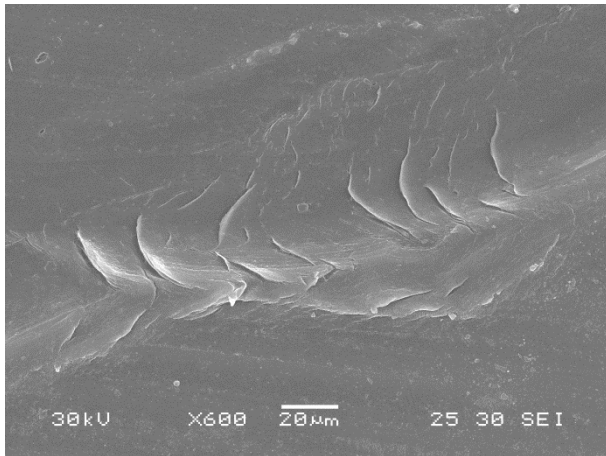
Smearing of Gear Flanks 6x10⁶ Cycles
